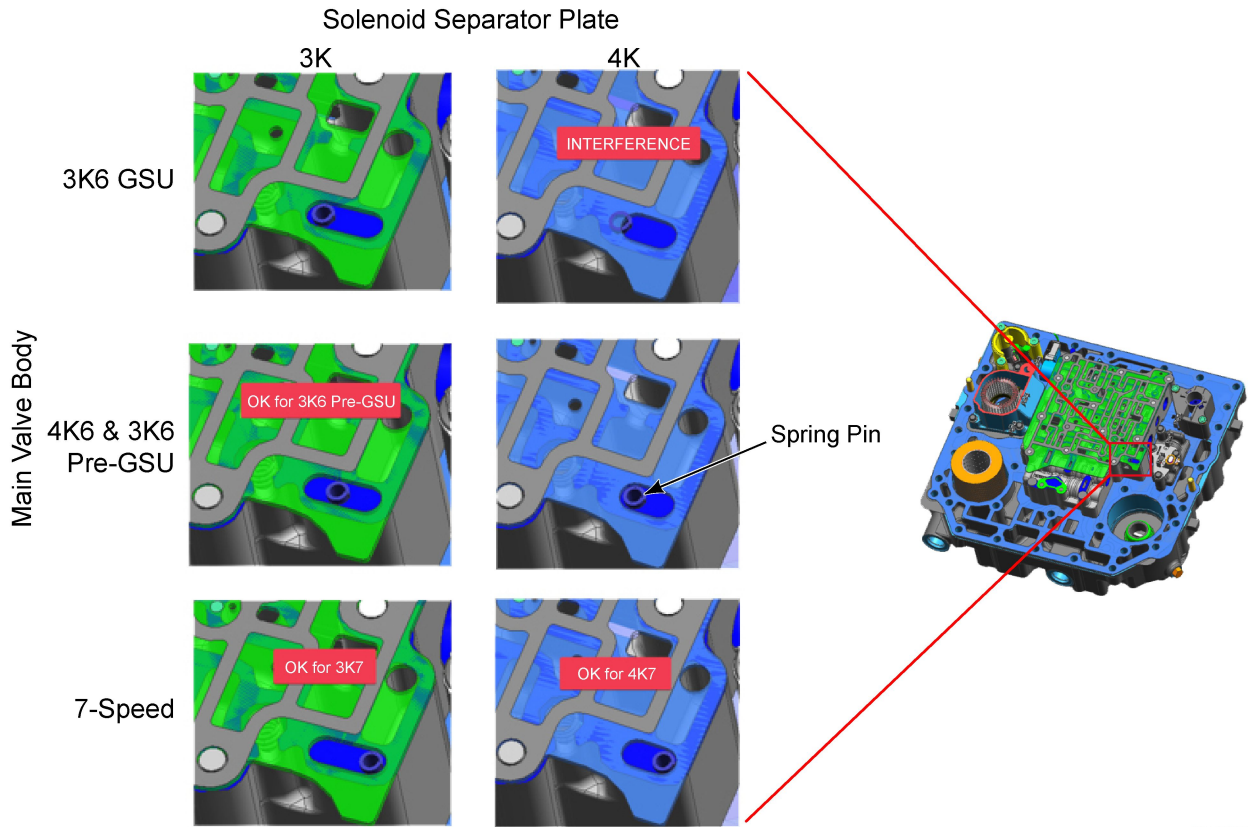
Spring Pin Anti-Misassembly Features In Lower Valve Body
